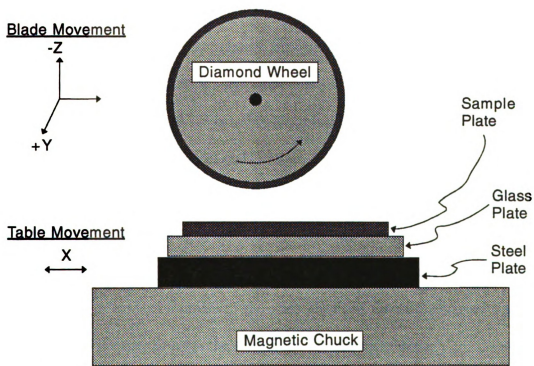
Schematic of the high speed cutting saw showing the specimen plate, glass and steel mounting plates, and the magnetic chuck.
